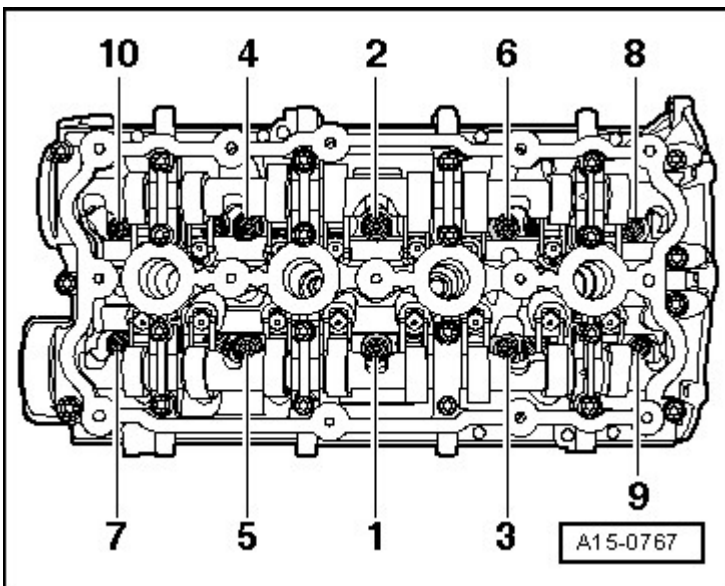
Identifying Cylinder Head Bolts Tightening Sequence
